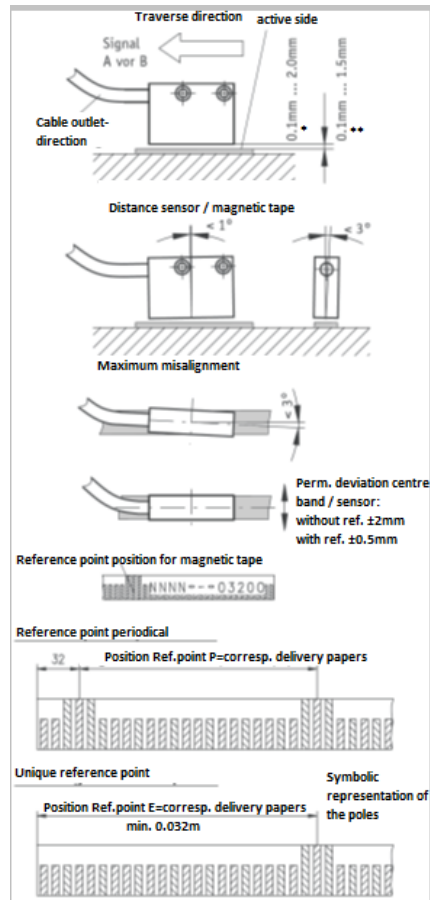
Definition of counting direction / mounting / tolerances
